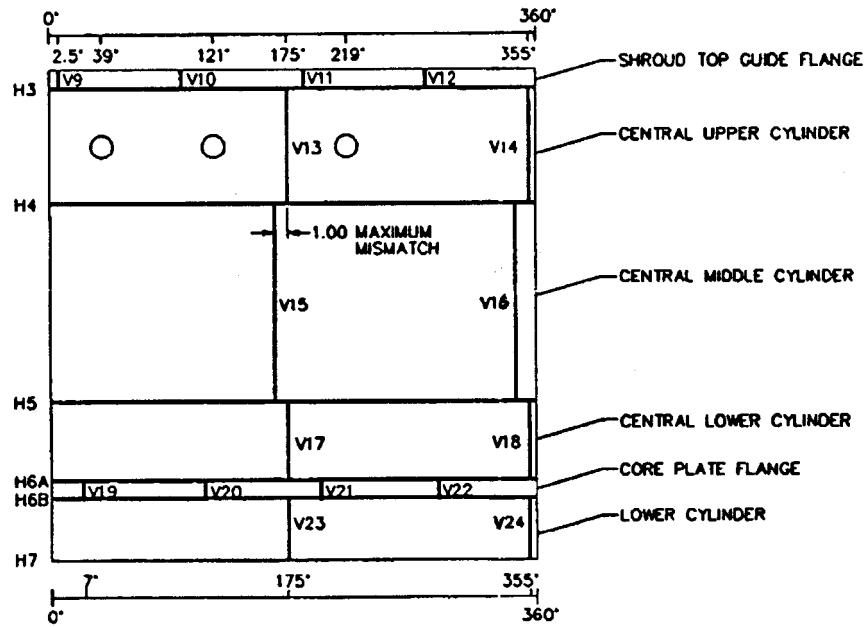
Weld Designations for GGNS Shroud.
